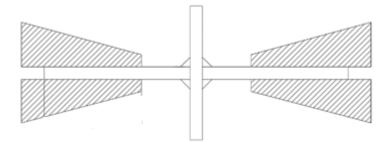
Picture of direction of loading on the welded joints [39].
